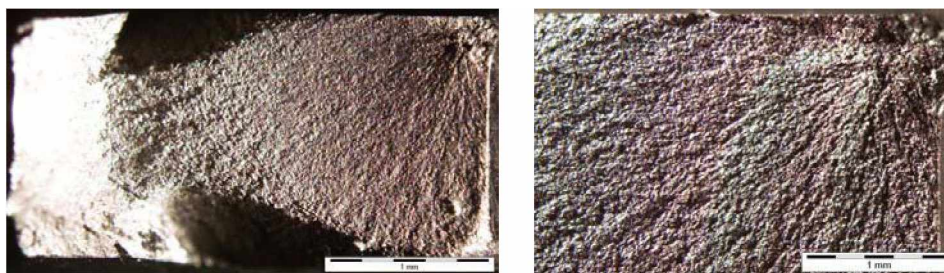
Fracture surface of a fretting fatigue specimen at a stress level of 200 MPa
